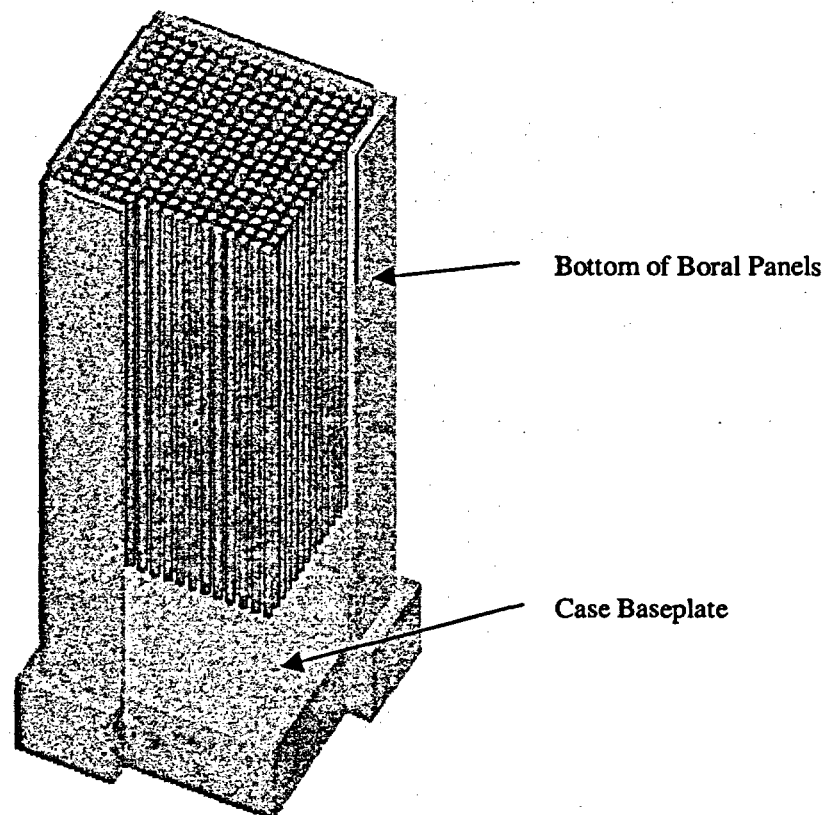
MPC-24 cask showing the fuel assembly below the Boral panels
